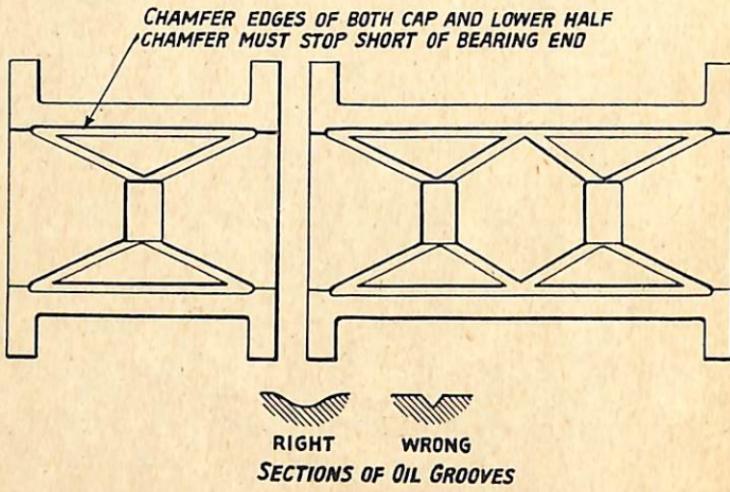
Oil grooves for single and double ring bearings (diagrammatic only)
